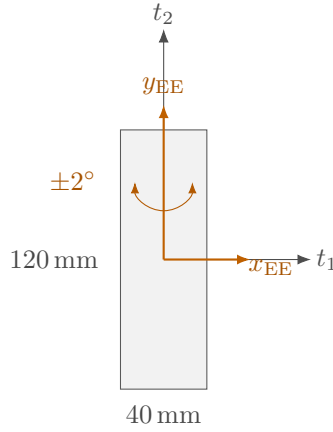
Calibrated tool face and mounting axes in the surface plane.
